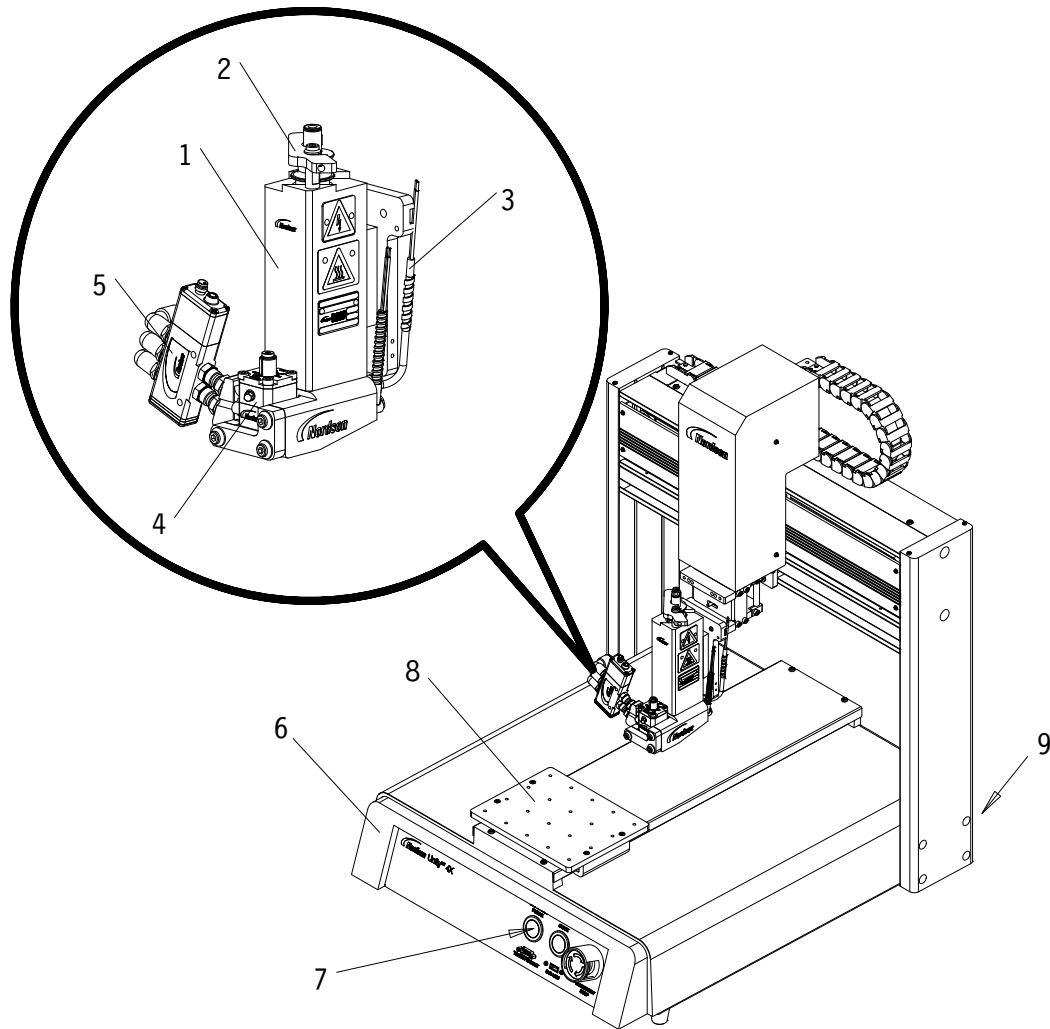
Key components of the applicator and robot assemblies – PURJet 30XT
